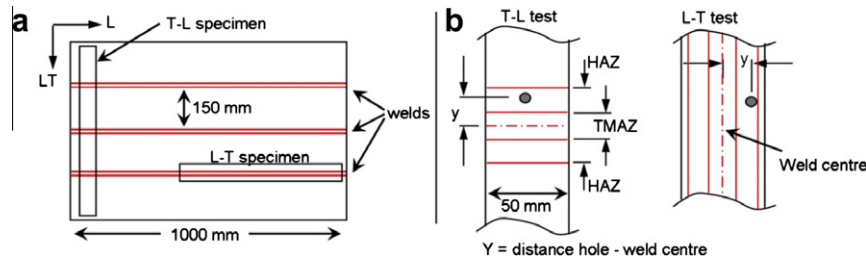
(a) Example of how specimen are taken from the welded sheets and (b) details of how welds and holes are situated in the different test specimens.
